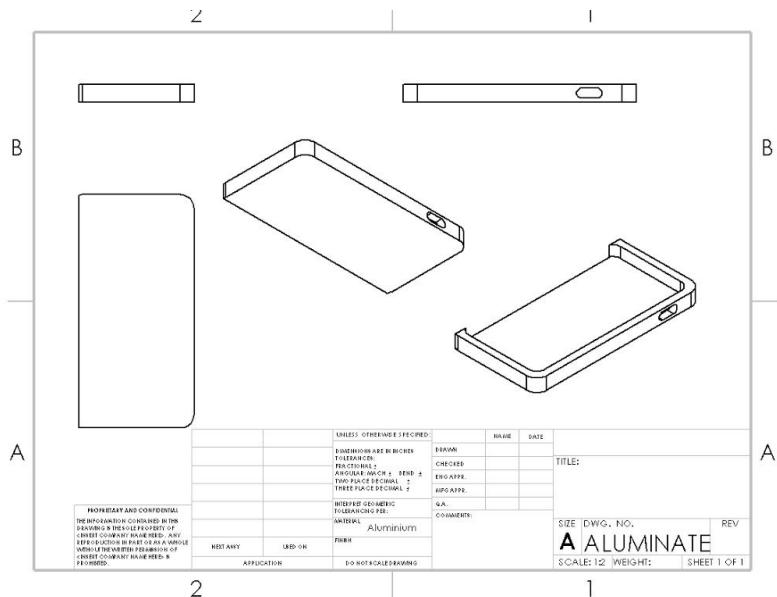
Solidworks drawing of the Faraday Case Prototype 3.0 - Lower part
